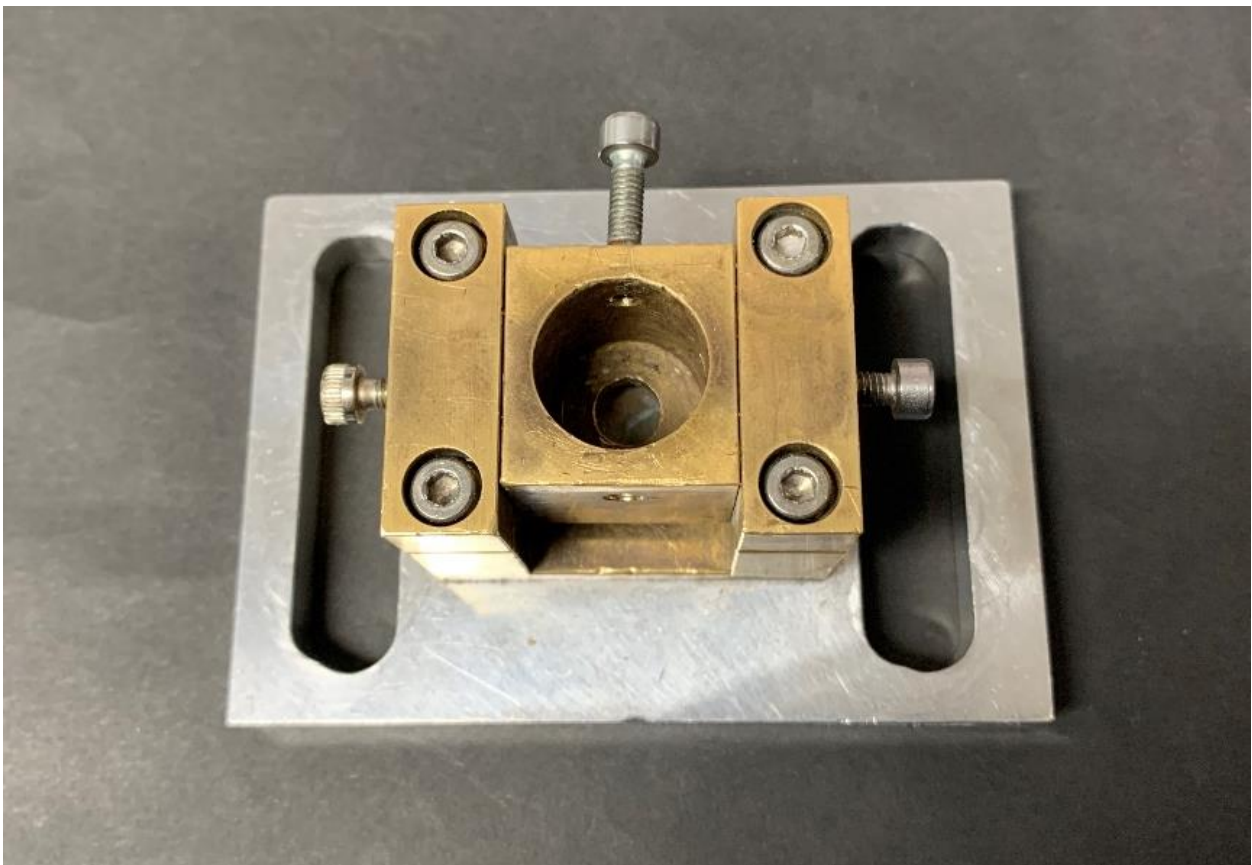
Shows the attachment unit used to firmly hold the specimen on the table of the universal testing machine.
